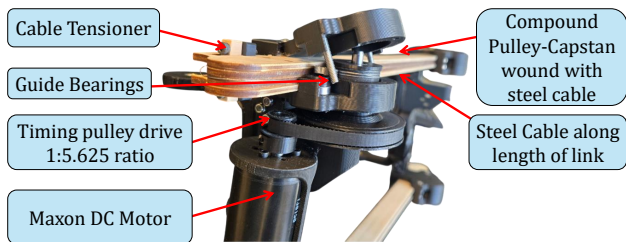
Linear capstan drive assembly for lateral force feedback, showing the Maxon DC motor, 1:5.625 timing pulley stage, compound pulley-capstan wound with steel cable, guide bearings, and cable tensioner. The steel cable transmits motor torque along the length of the output link to the bearing block carriage.
